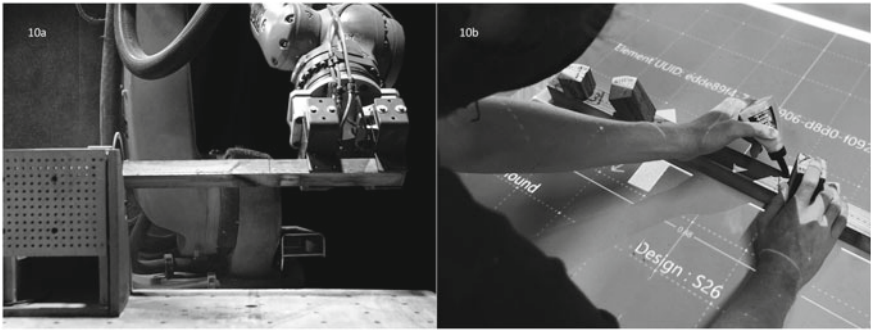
a Photograph of the robotic cutting process for the connectors. b Pre-gluing connectors for all secondary-layer structure components
